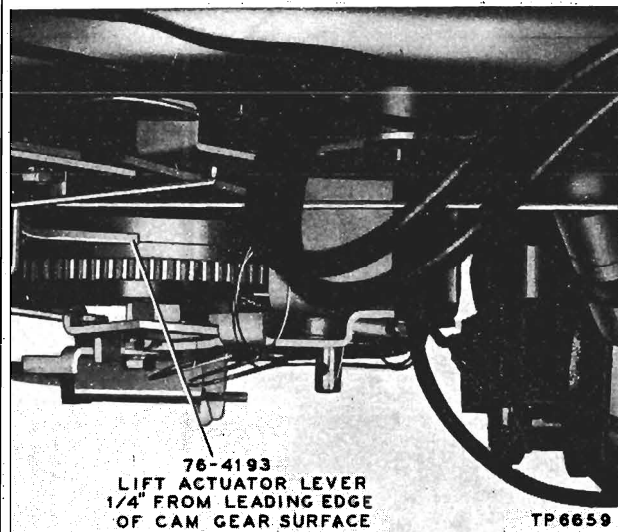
Tone-Arm Vertical Timing Adjustment, Showing Lower Actuator Lever in Contact with Cam Gear
